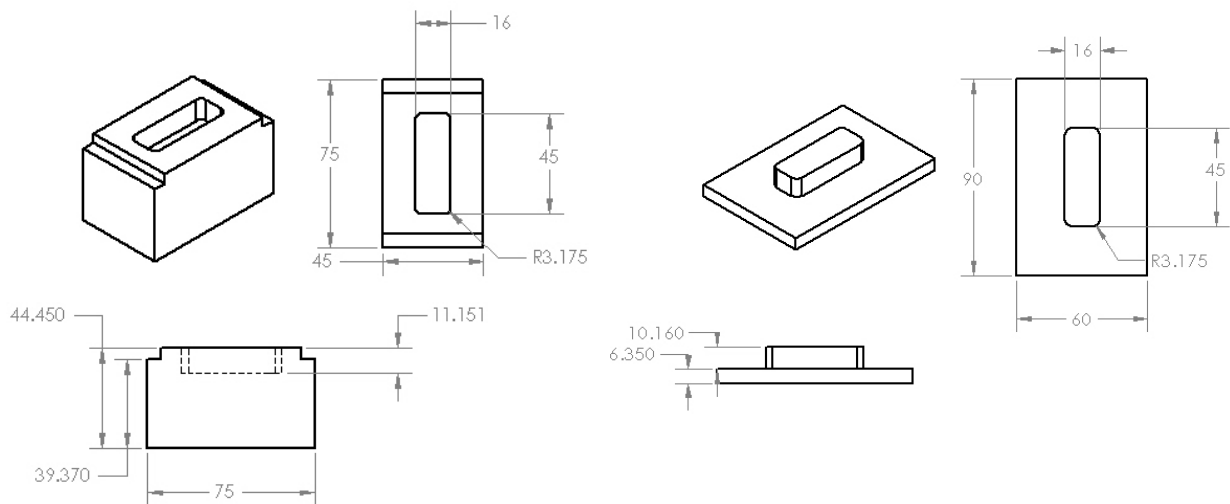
Drawings for the base and lid of the team's compression mold. The base (left) contains a cavity into which the raw material is placed. The two cuts on either end are for prying the mold open after the piece has cooled. The lid (right) contains an extrusion matching the cavity in the base. Overall the lid and base were cut very thick to help prevent warping of the mold during repeated use.
